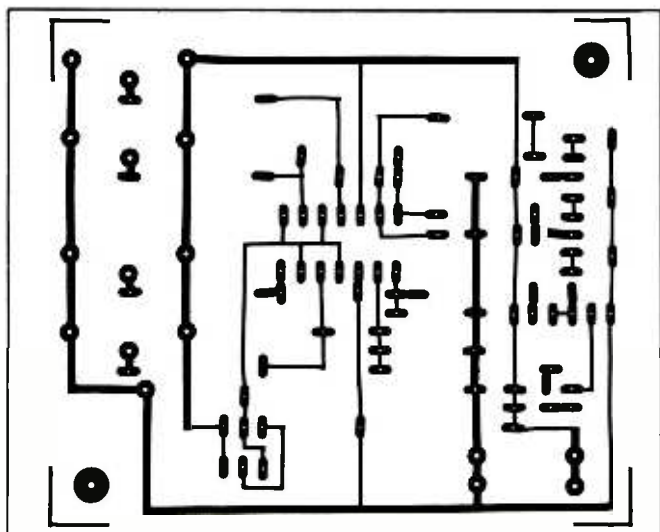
Actual-size etching-and-drilling guide for fabricating printed-circuit board.
